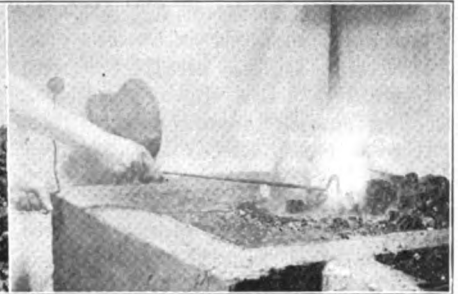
THE COKE IS PUSHED INTO THE HOLE
